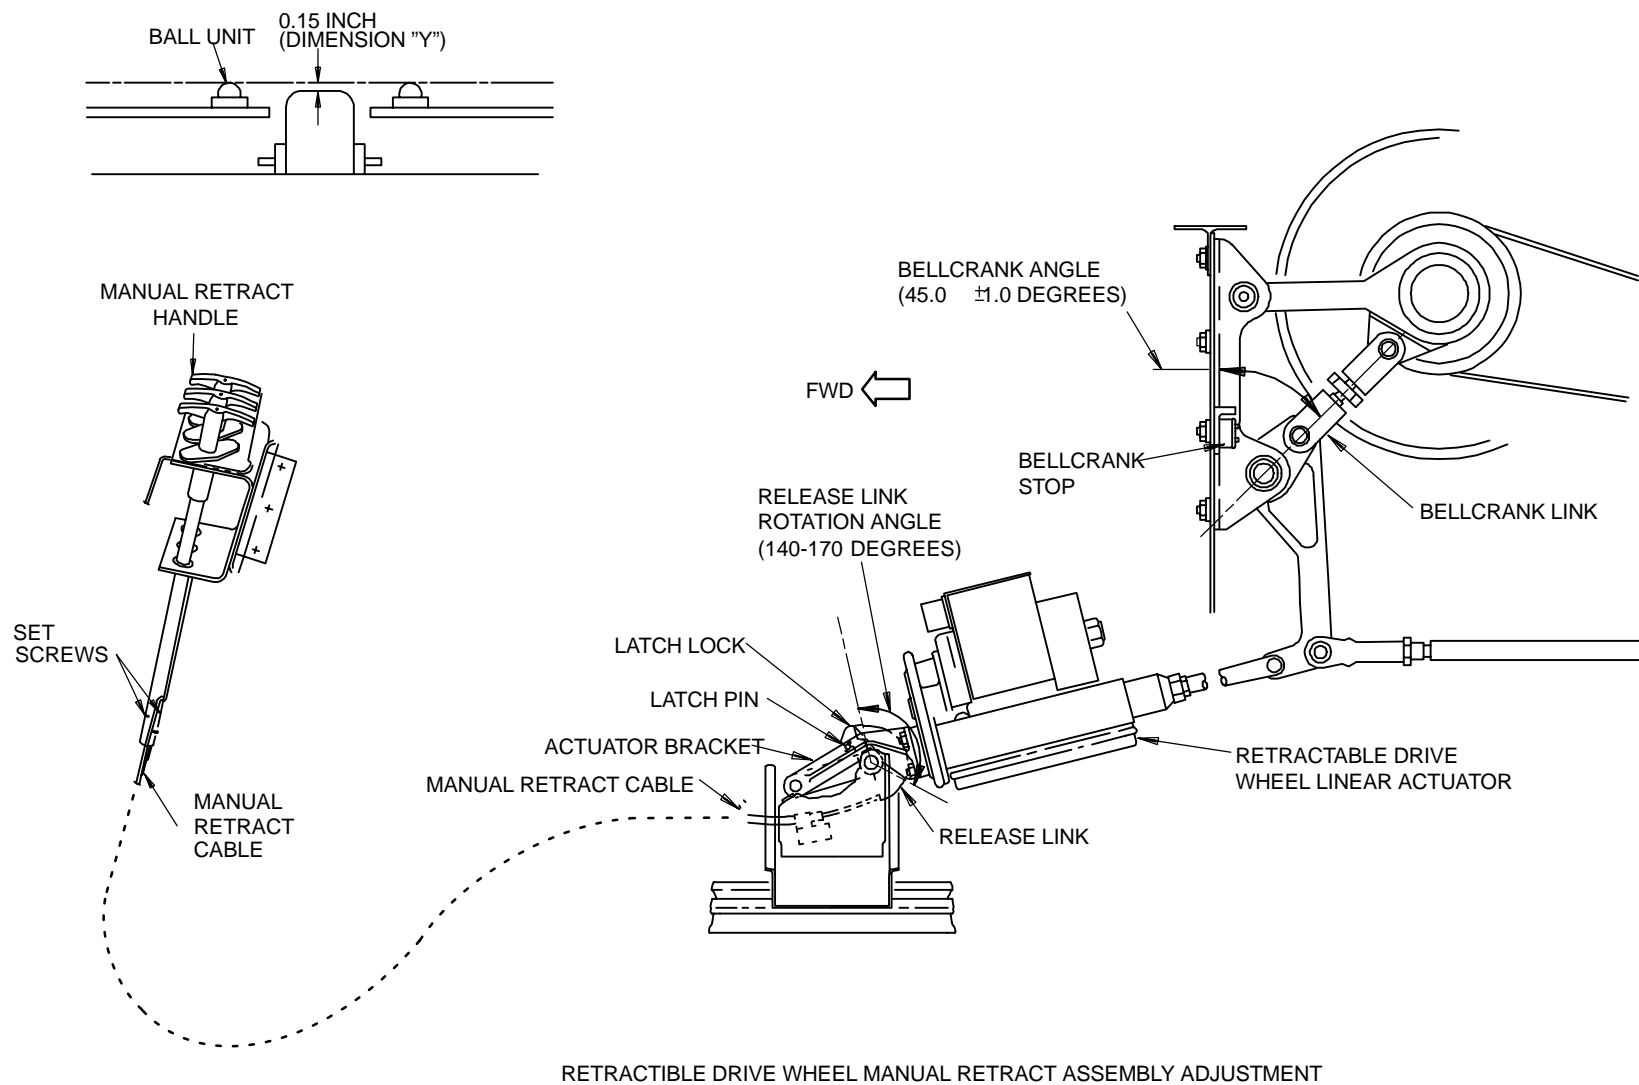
Lower Cargo Comp. Drive Wheel Assembly
